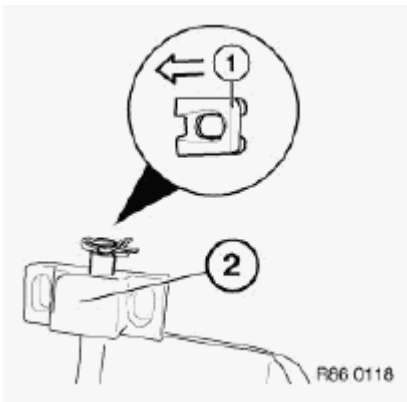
Identifying Raised Edge & Bearing Pedestal
